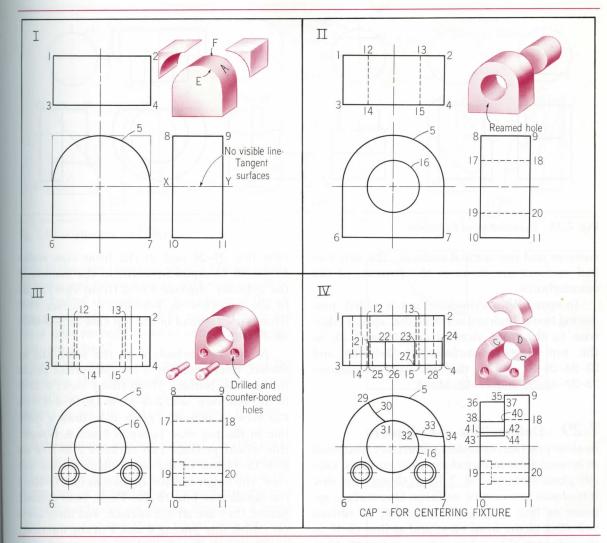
Machining a Cap—Cylindrical Surfaces.
